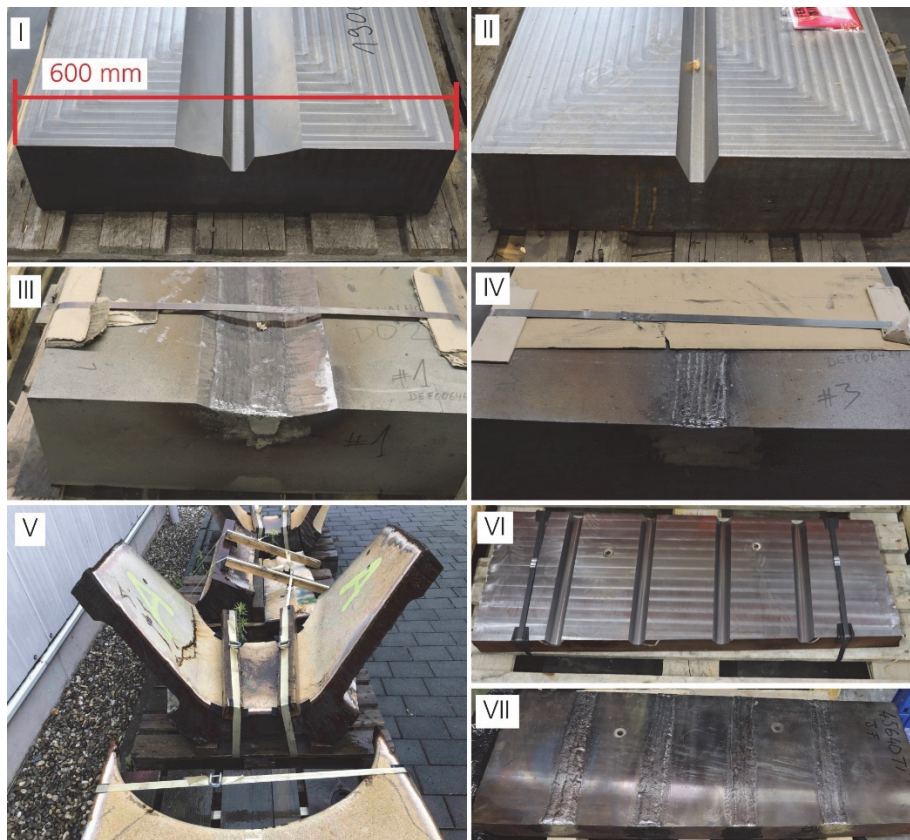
I: cast block with groove for removal of bending specimens; II: cast block with groove for removal of axial specimens; III + IV: cast blocks with welded grooves; V: cut hub into smaller segment; VI: hub's segment with grooves; VII: hub's segment with welded grooves.
